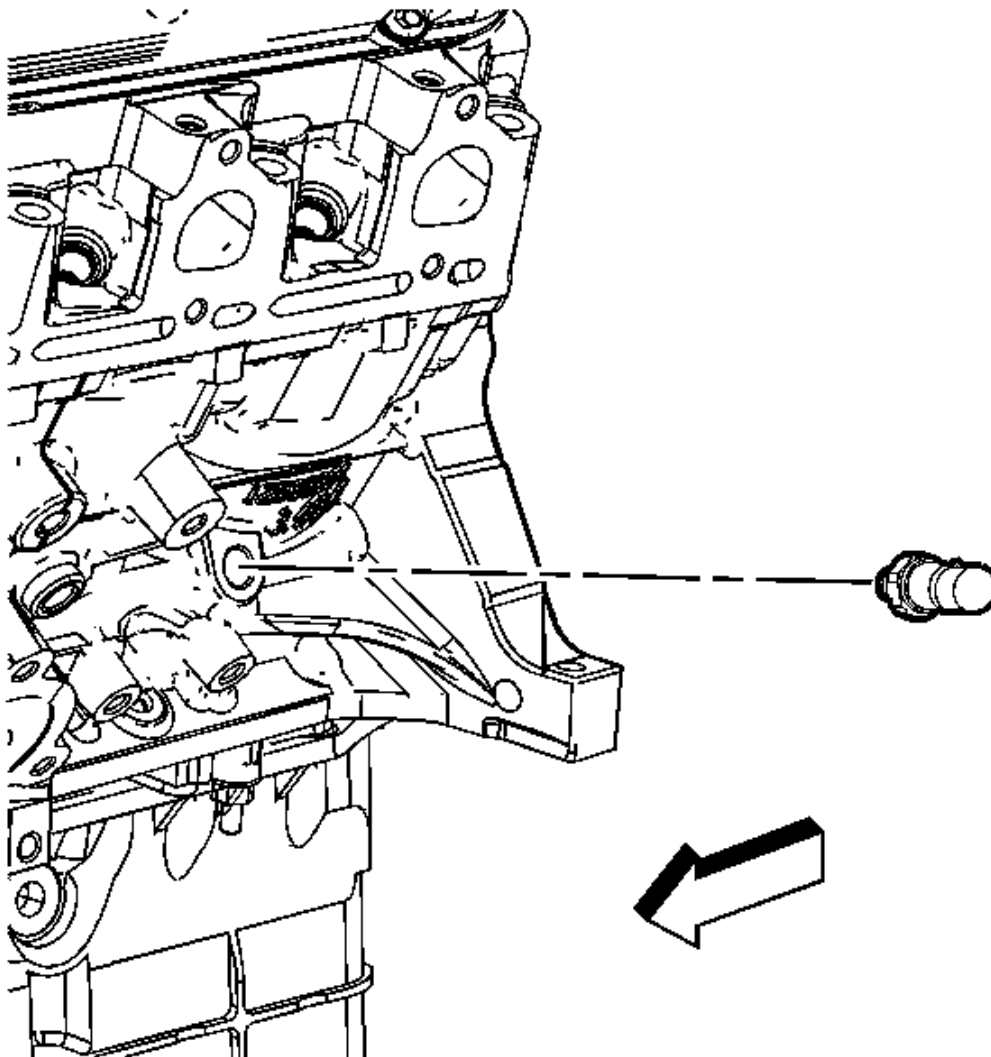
Locating Engine Oil Pressure Indicator Switch
